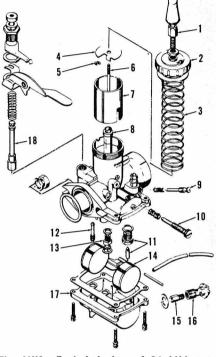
Exploded view of 24 MM carburetor used in the 100/MX "Super Rat" engine.
